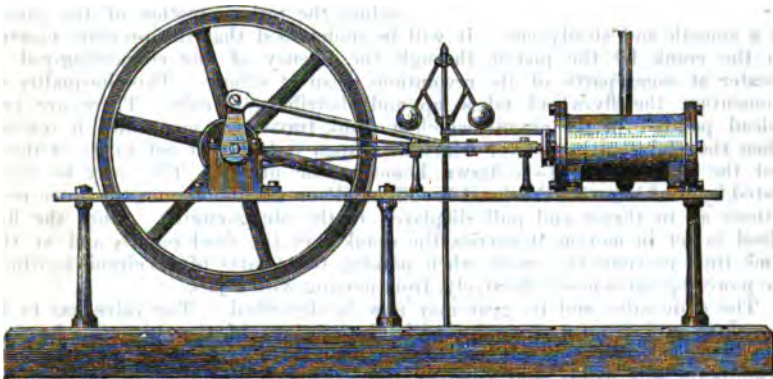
HORIZONTAL HIGH-PRESSURE STEAM-ENGINE.
